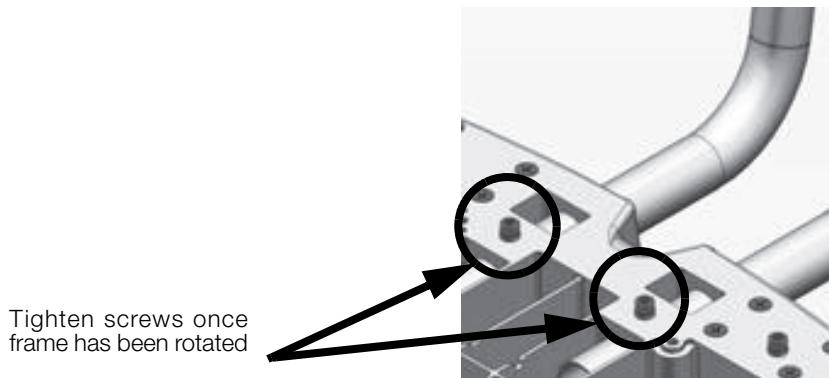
Tighten Screws Once Frame Has Been Rotated and Reinserted
